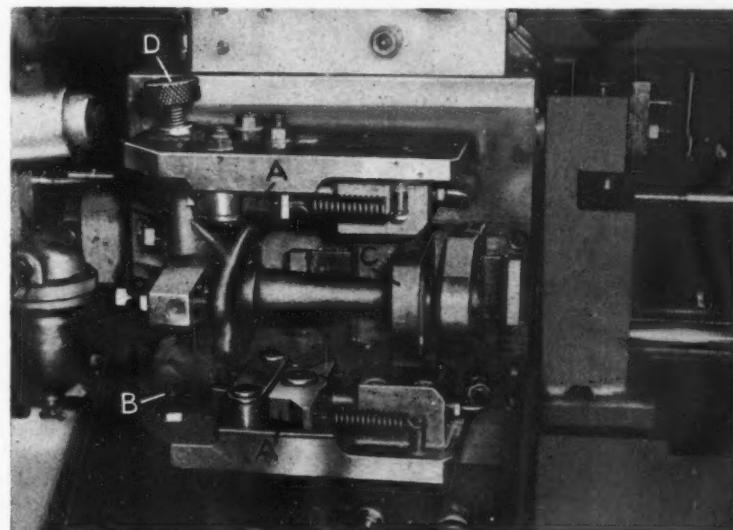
Close-up View of One of the Fixture-stations on the Fertungsmittel Machine, Showing the Clamping and Locating System
